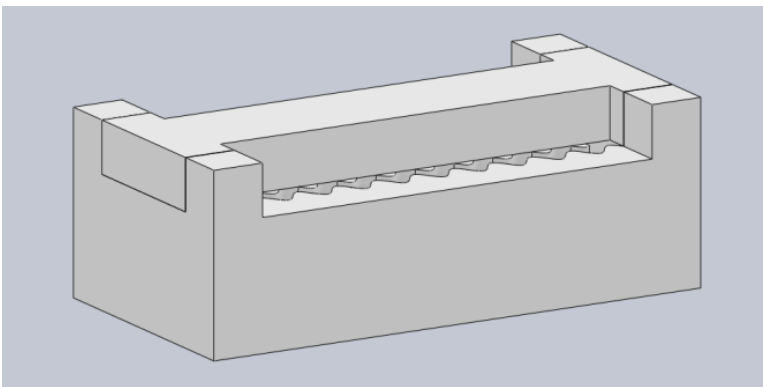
The assembly of the sine mold and the sine mold insert used to create the top of the sine actuator.
